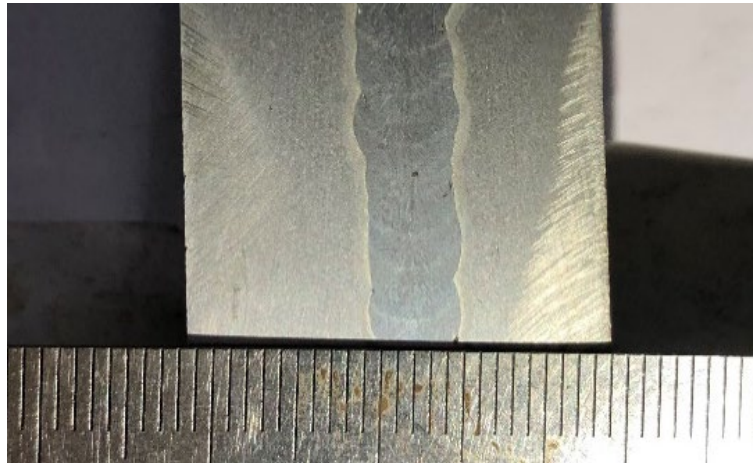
Cross-sectional area of a good fusion for single-pass multi-layer welding
